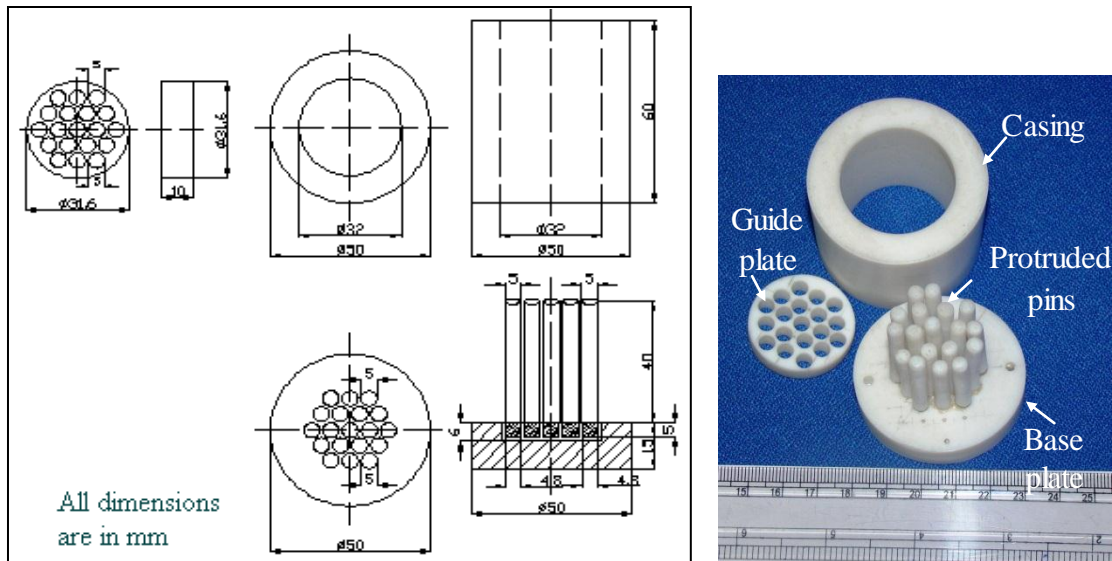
Design of the mould along with mould fabricated out of Teflon
